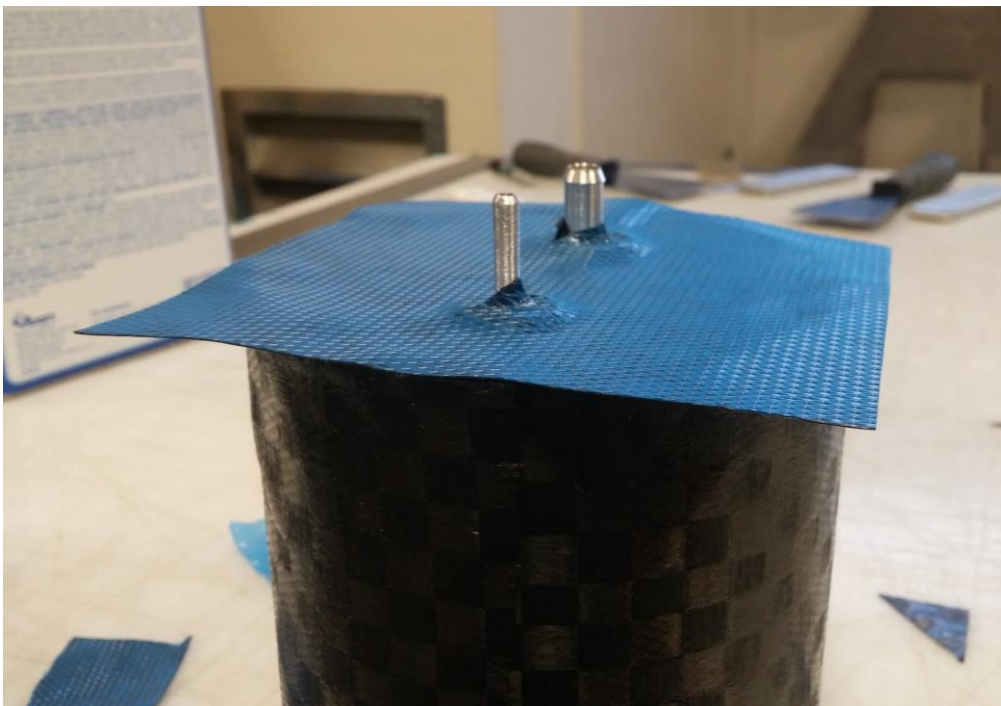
Fittings sticking through the second piece of carbon on the top of the catch can.
